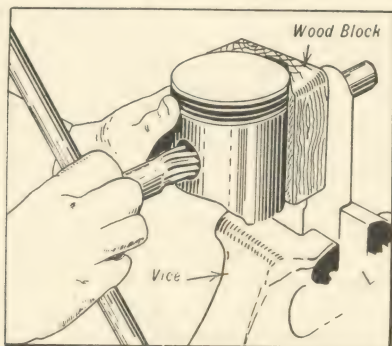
REAMERING GUDGEON PIN HOLE IN PISTON
